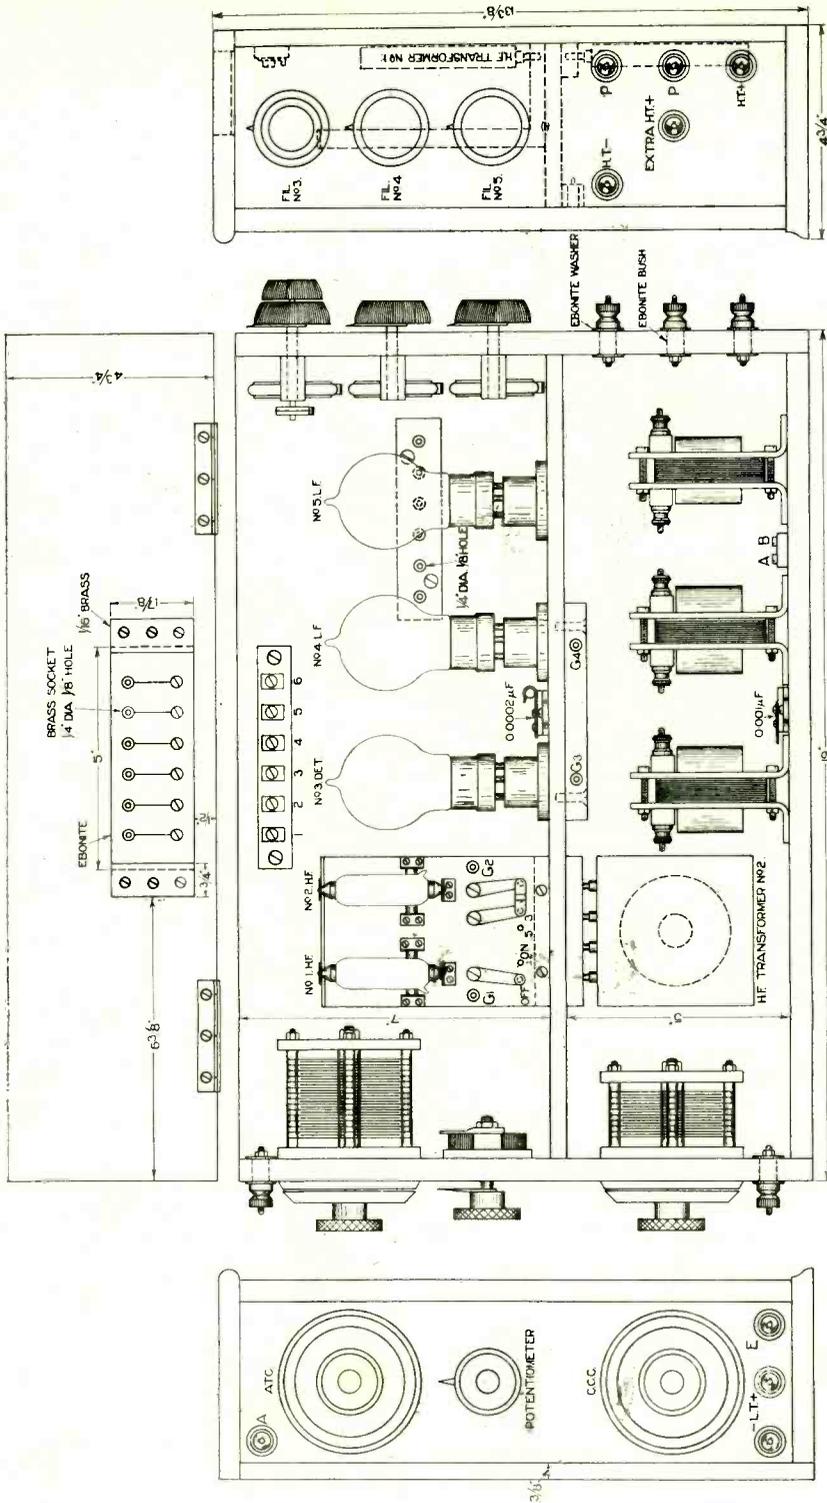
Scale drawing from which the general dimensions and lay-out of the components can be obtained.
